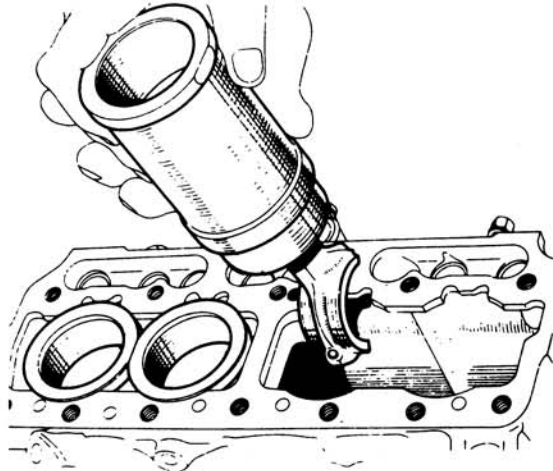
FITTING CYLINDER SLEEVE ASSEMBLIES IN BLOCK
